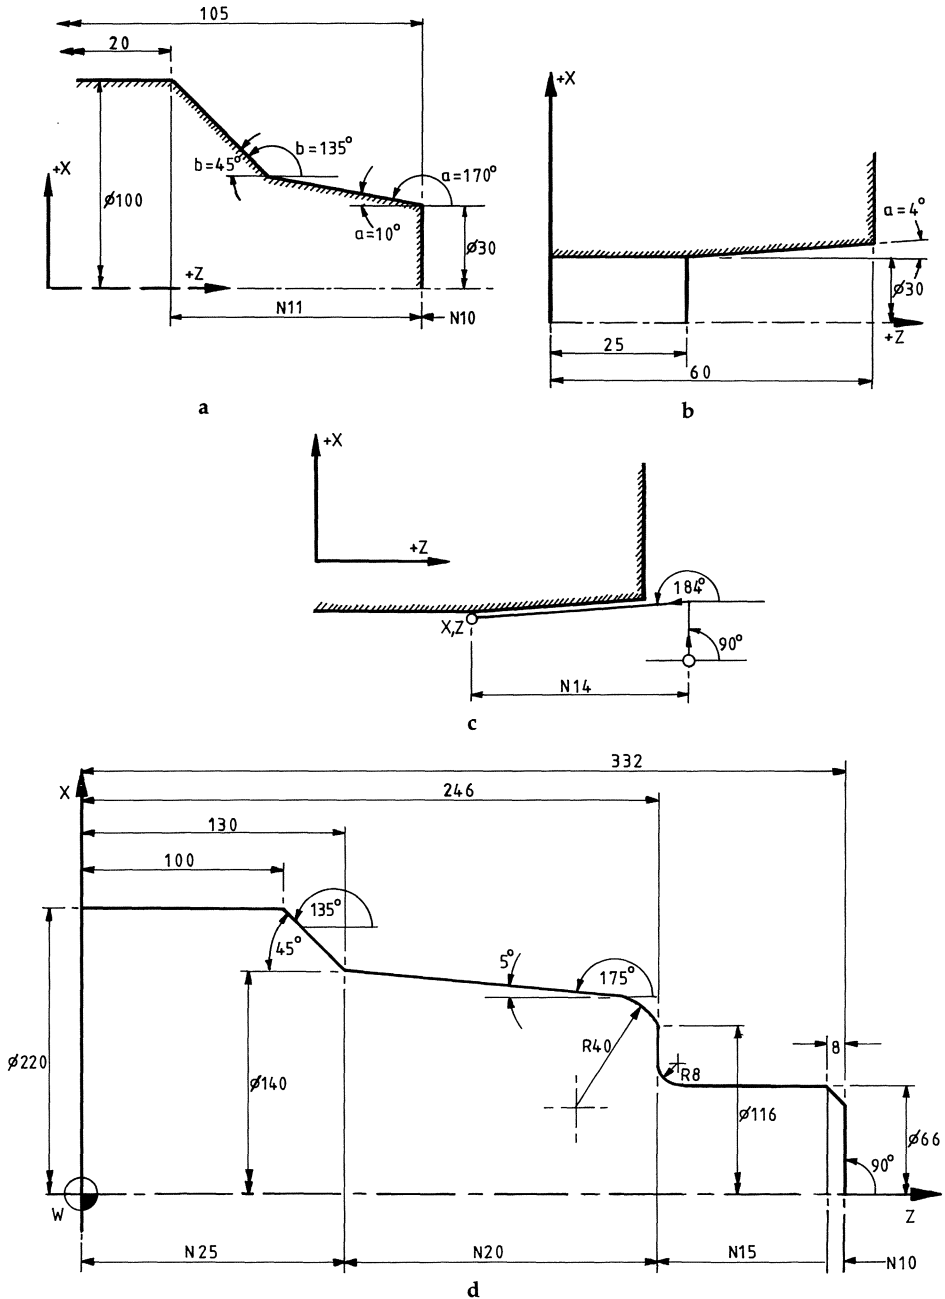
“Blueprint programming” for turning operations. a Contouring – external machining. b Contouring – internal machining. c Drawing dimensions. d Contour cycle programming for a turning centre. [Courtesy of Siemens.]
